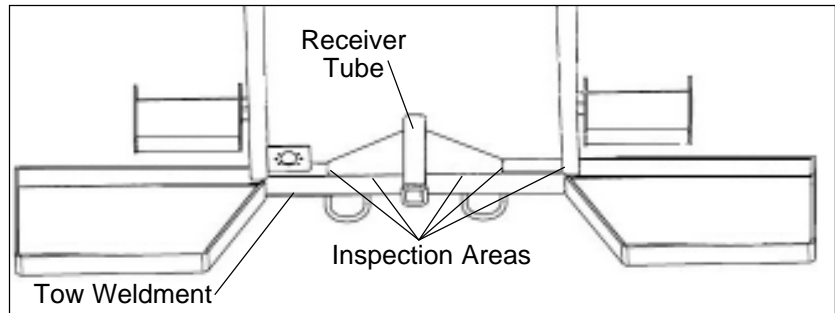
Tow Weldment Inspection, Type 1
